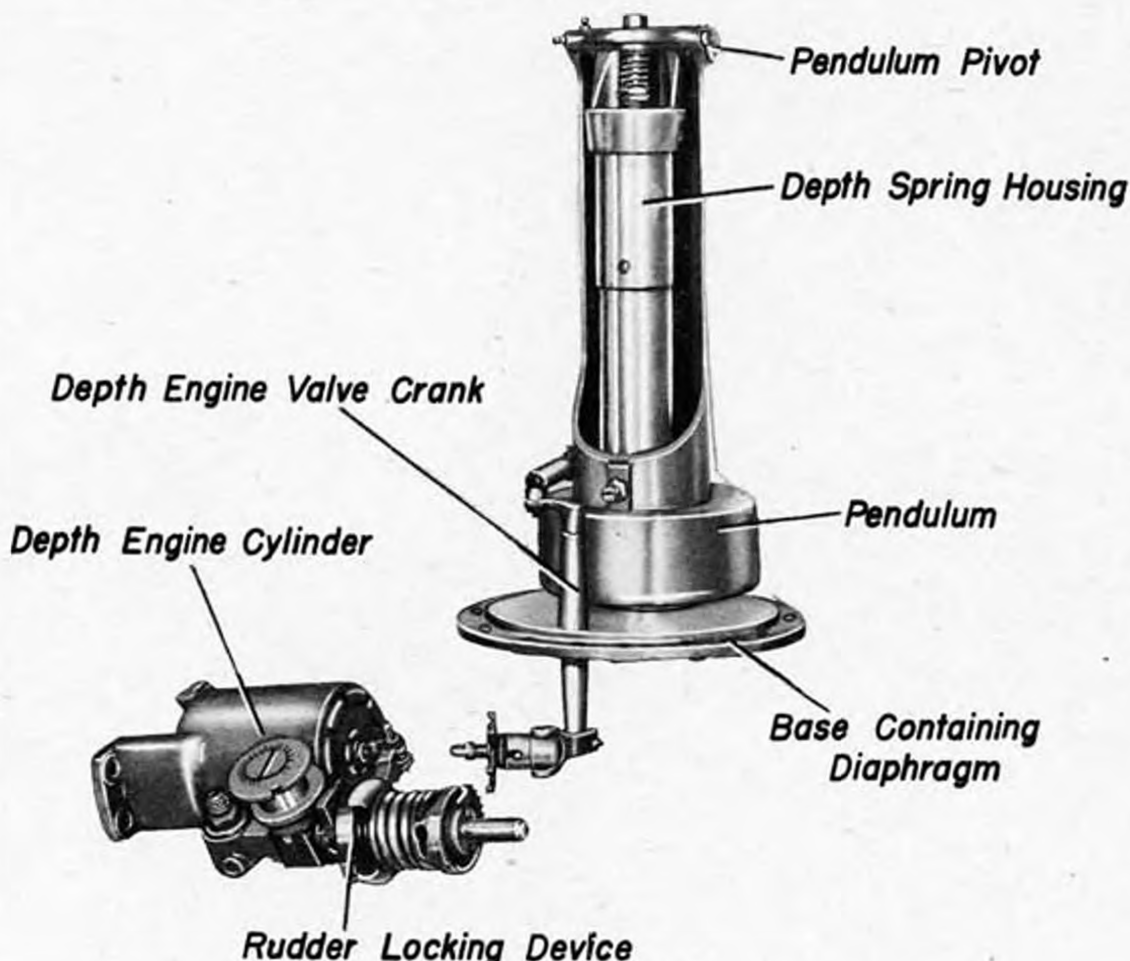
Torpedo Sixth Year Type, Depth Mechanism
